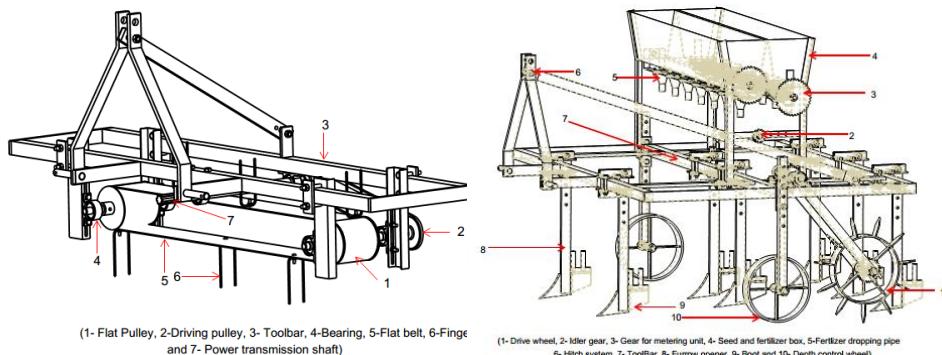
Isometric view of prototype residue handling device and multi toolbar no-till drill
